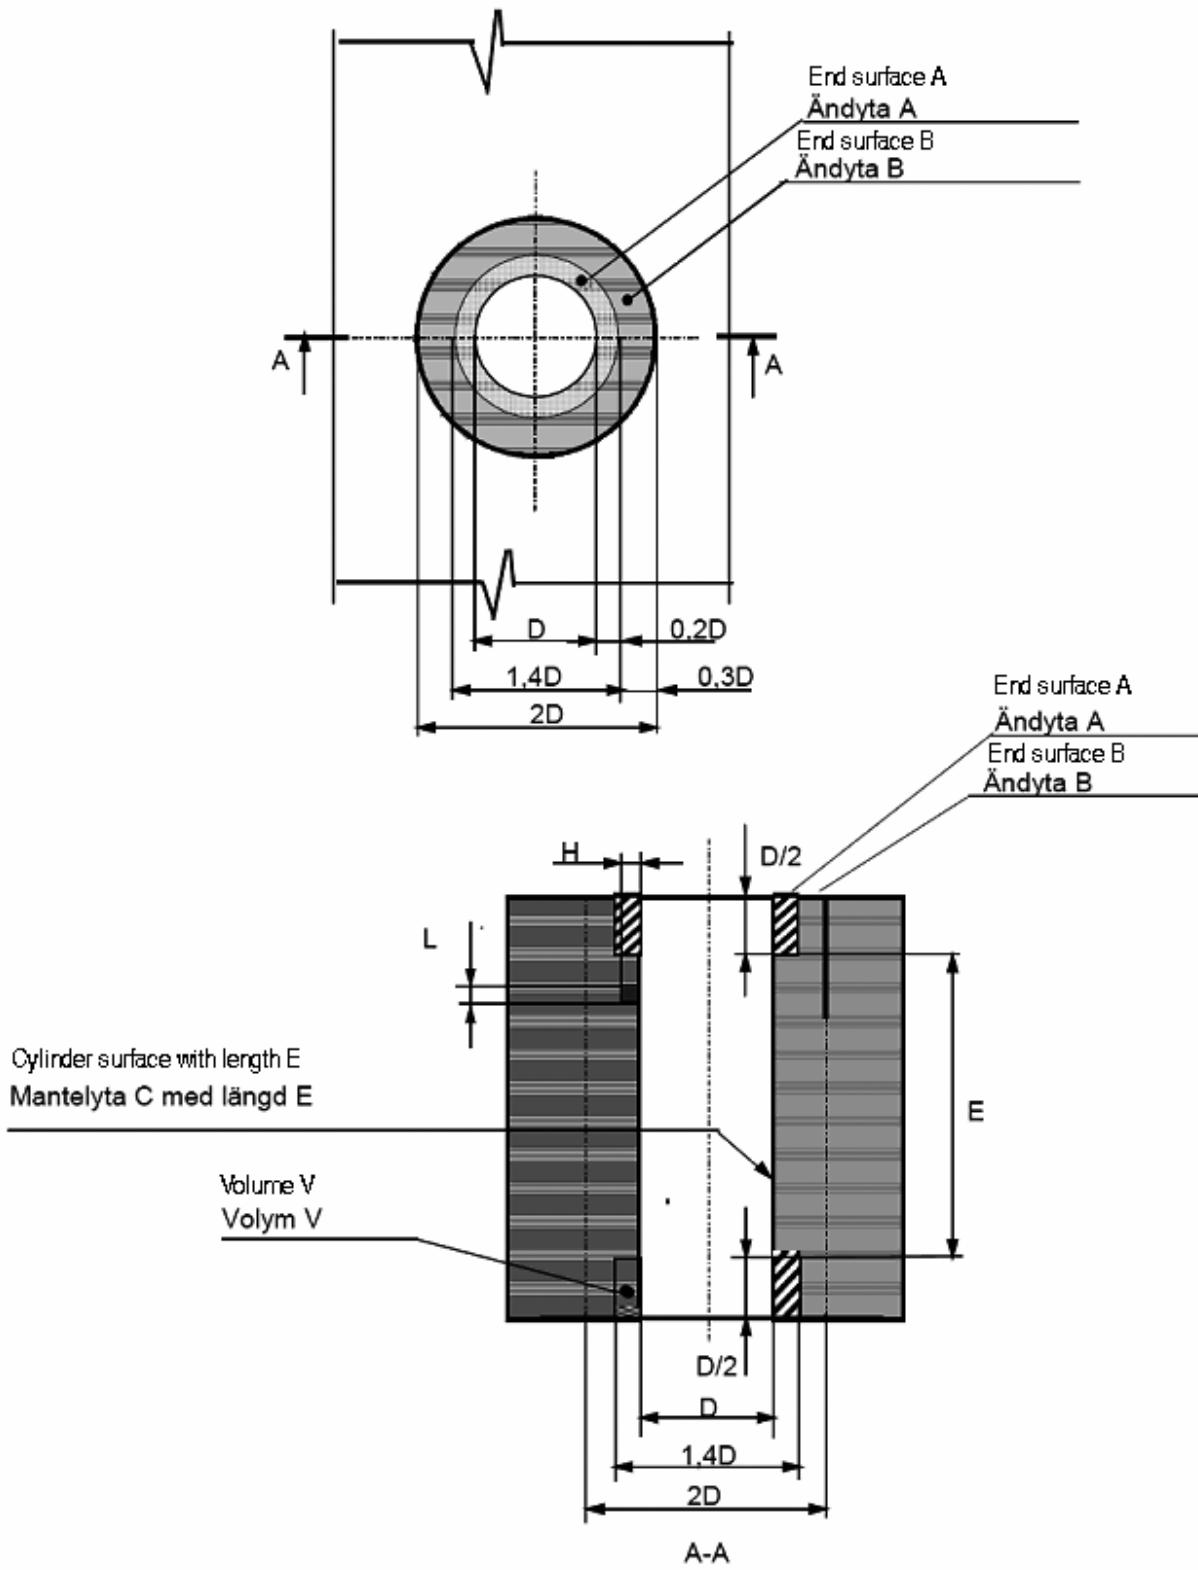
Defects at machined holes / Defekter vid bearbetade hål
